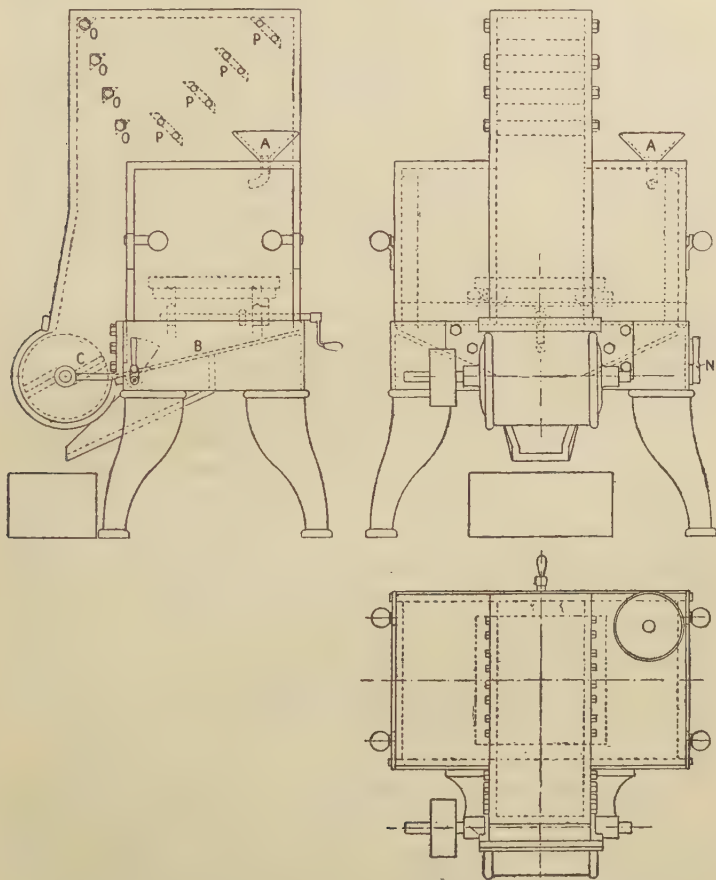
Deflector Type Cloudburst Hardness Testing Machine.
